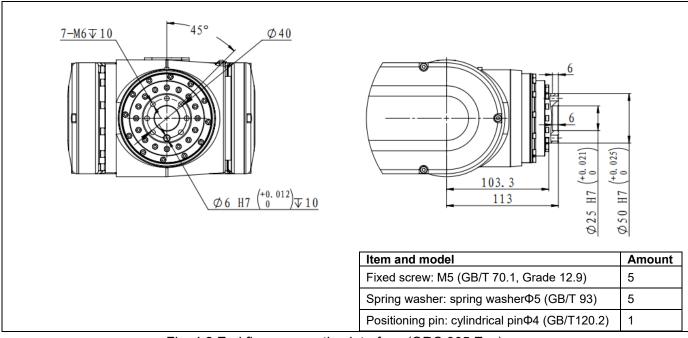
End flange mounting interface (QRC 305 Eco)
